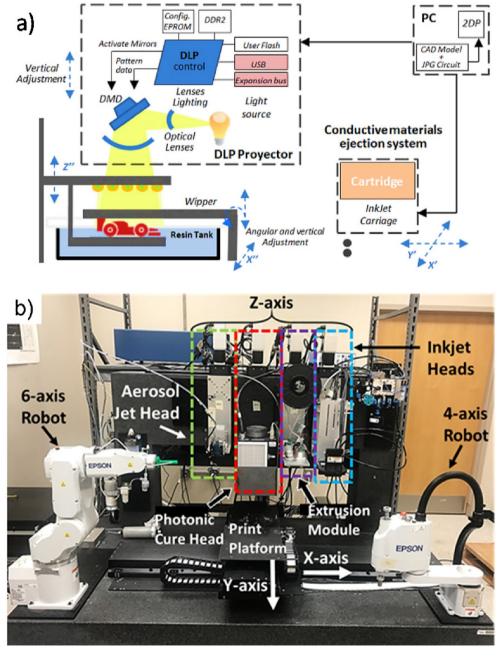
(a) Developed DLP system (used for 3D printing) and inkjet system (for circuits) [231]. (b) m4 3D printer, a hybrid multi-material multi-method AM system for fabricating intricate structures [43].
